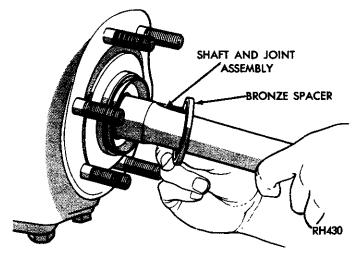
Axle Shaft & U-Joint Removal/Installation
